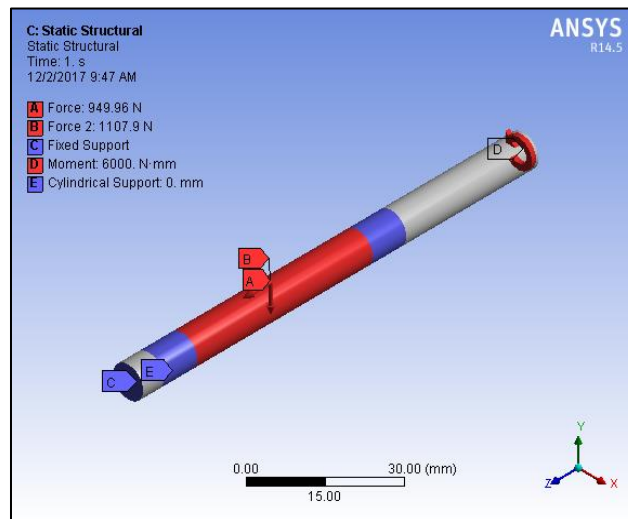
Fixed and forced Condition of steering shaft for pinion gear
